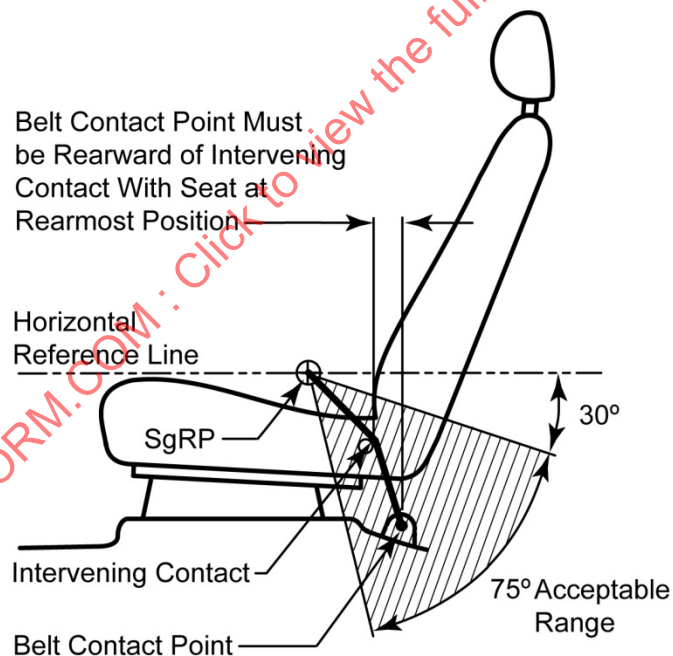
BELT BEARS ON SEAT FRAME
